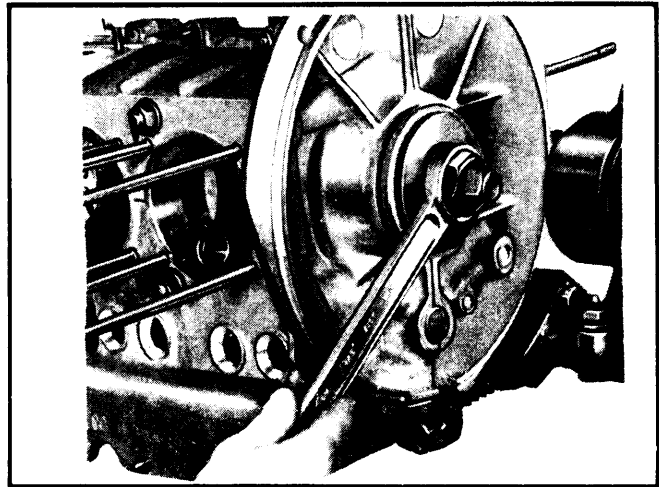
Crankshaft Oil Seal Installation with Special Tool
